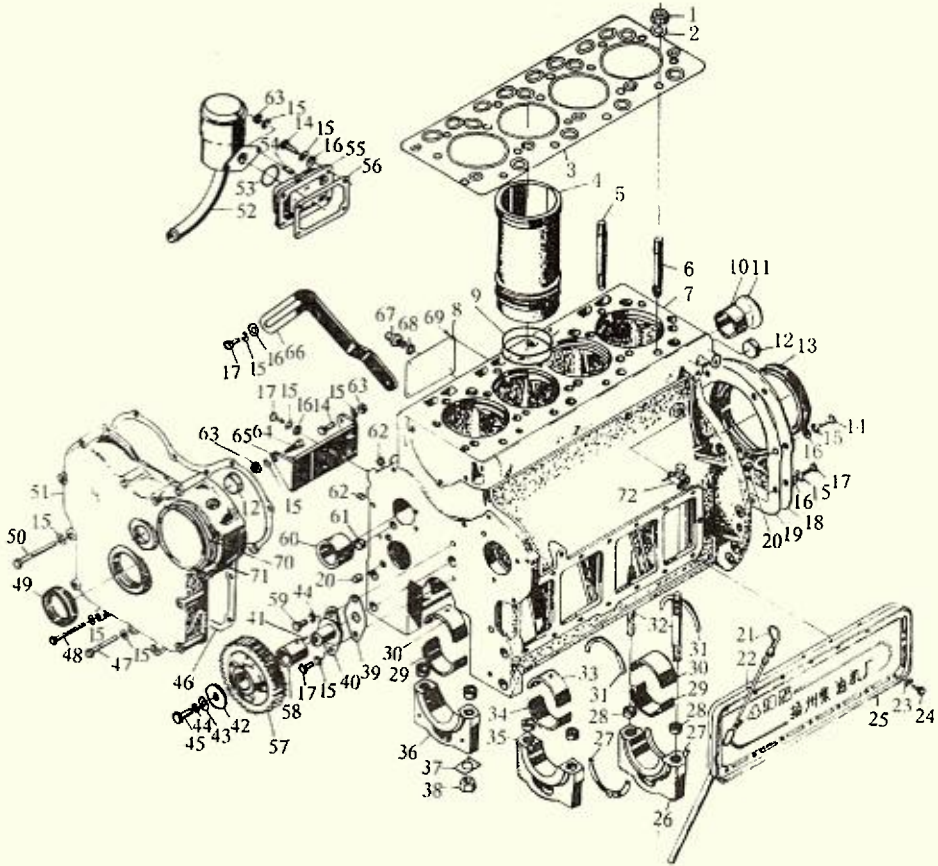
1 Diesel engine cylinder block of Model 495
